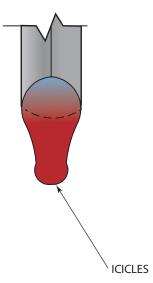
Welding too slow or with too high of an amperage setting will result in the weld metal dripping down like icicles.
